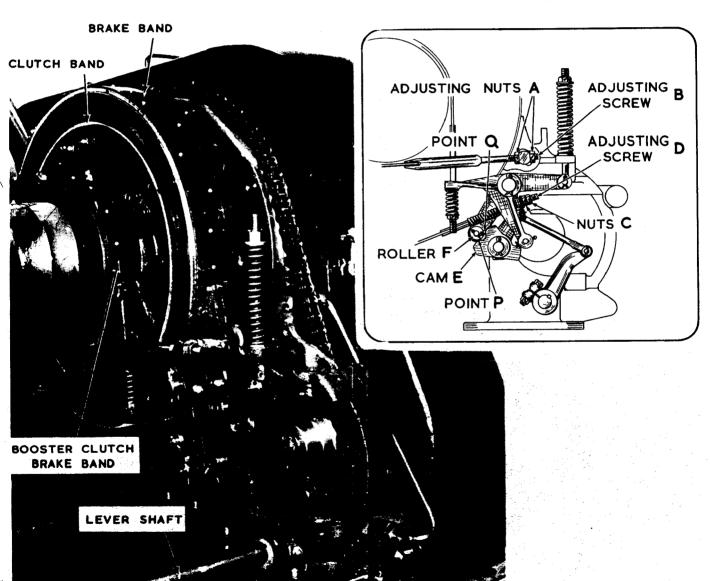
Booster Clutch and Boom Hoist Brake Adjustment.
